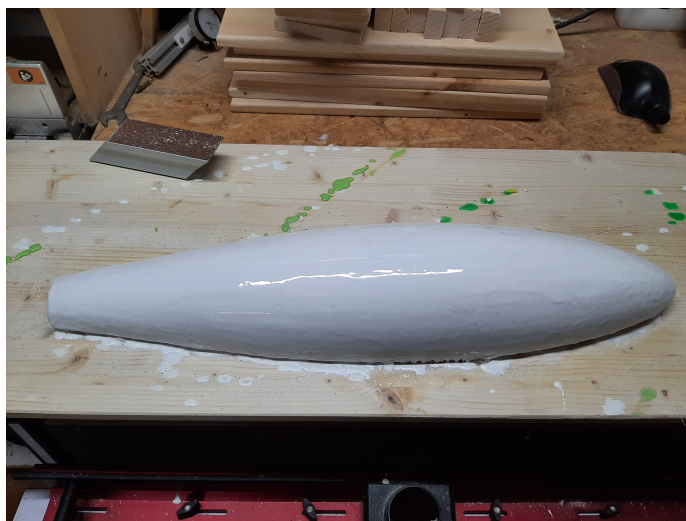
Coating the fiberglass reinforced hull blanks with a layer of UV-resistant epoxy.
